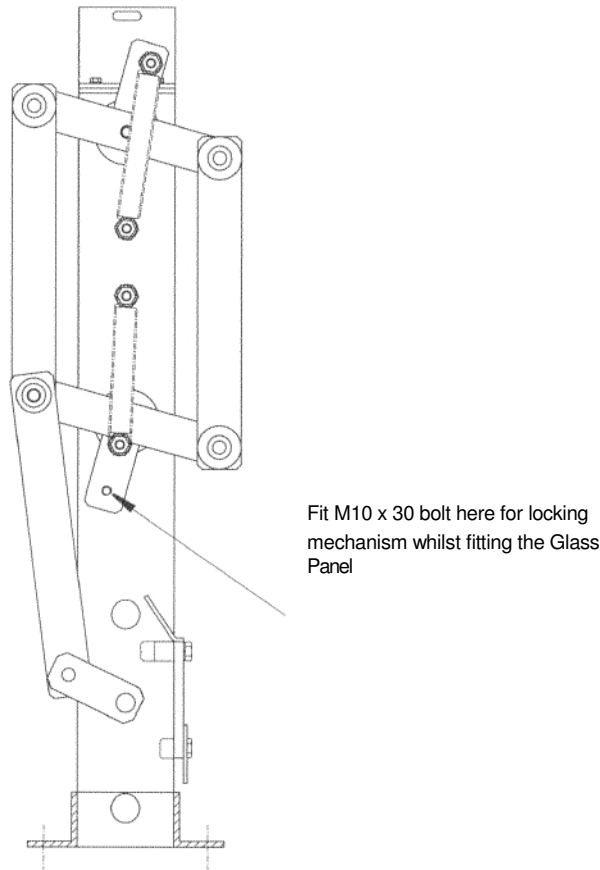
Static Barrier Glass Panel Fitting Detail
